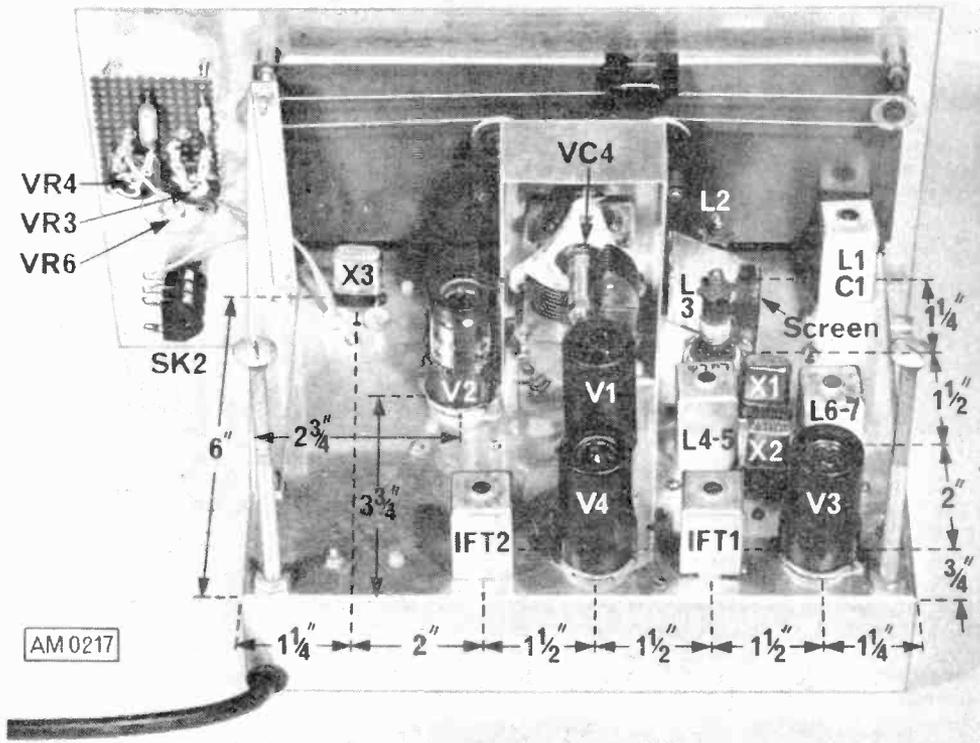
above. Location of the components mounted on the panel is shown in this photograph. The left hand edge of the chassis is indicated to show its position on the panel. Fig. 7: below, identifies the components mounted on top of the chassis. The long bolts, subsequently removed, are of great assistance when working on wiring etc. inside the chassis.
